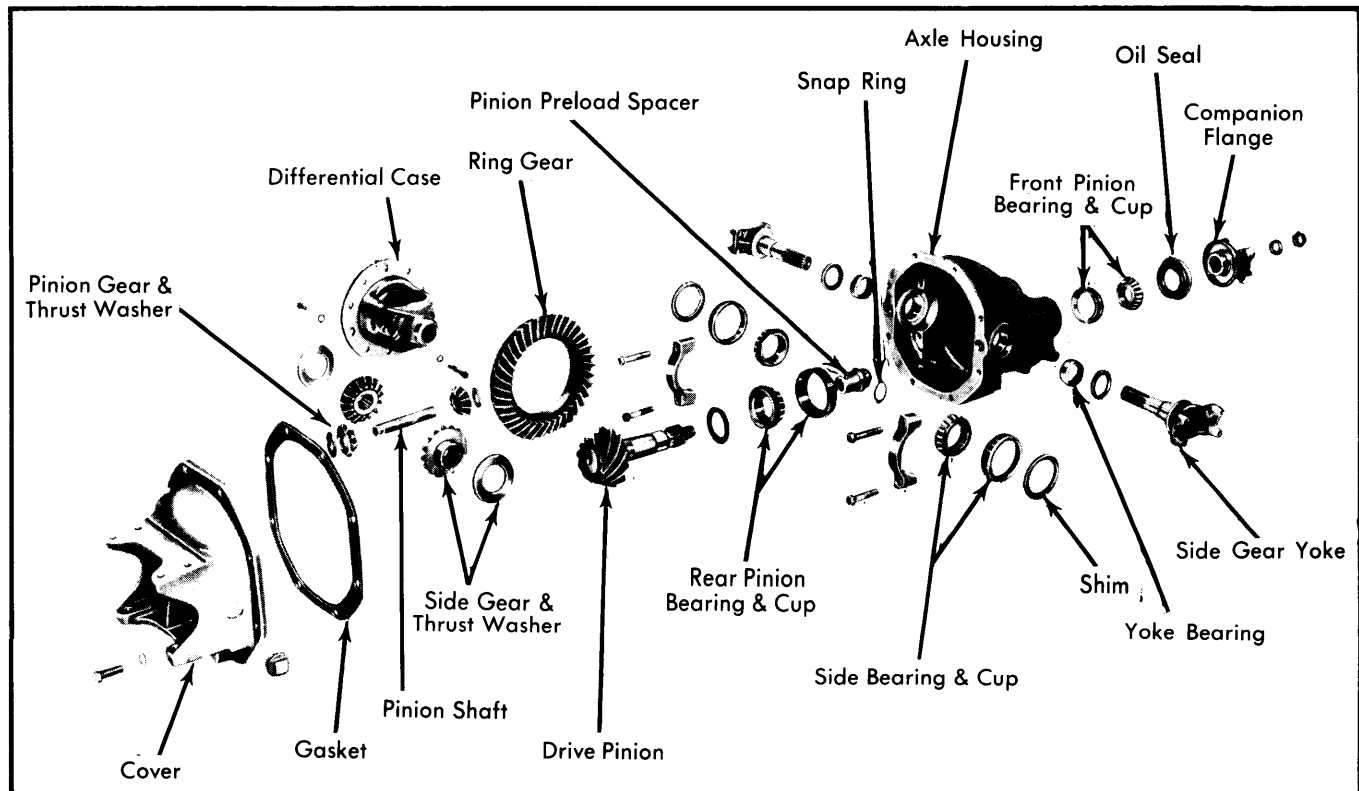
Exploded View of Corvette Rear Axle Assembly
